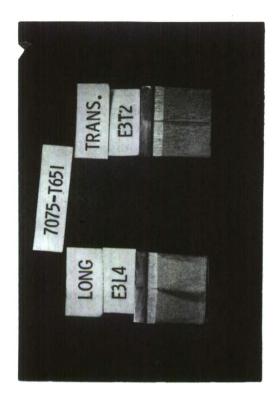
Fracture Surfaces of Representative Specimens
